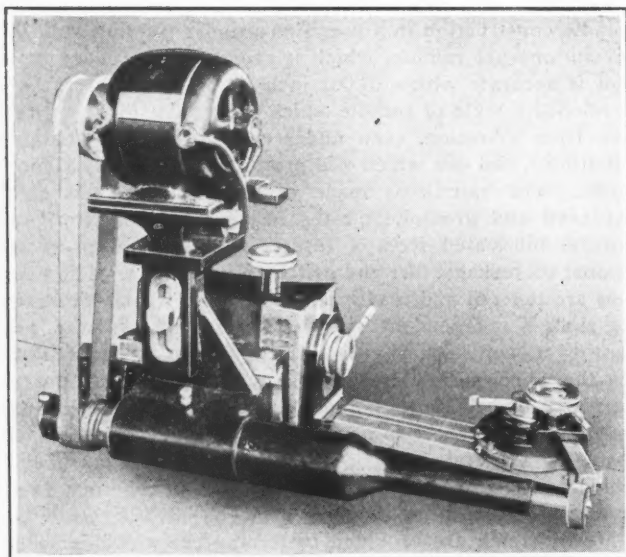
Lafayette Universal Grinder equipped for handling Internal Work
